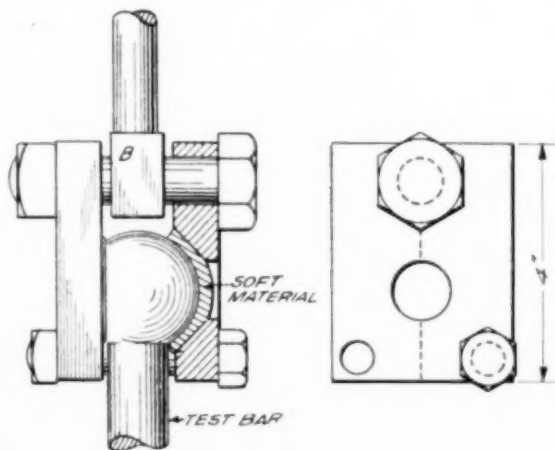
GRIP USED IN TENSION TESTS OF ROUND RODS
